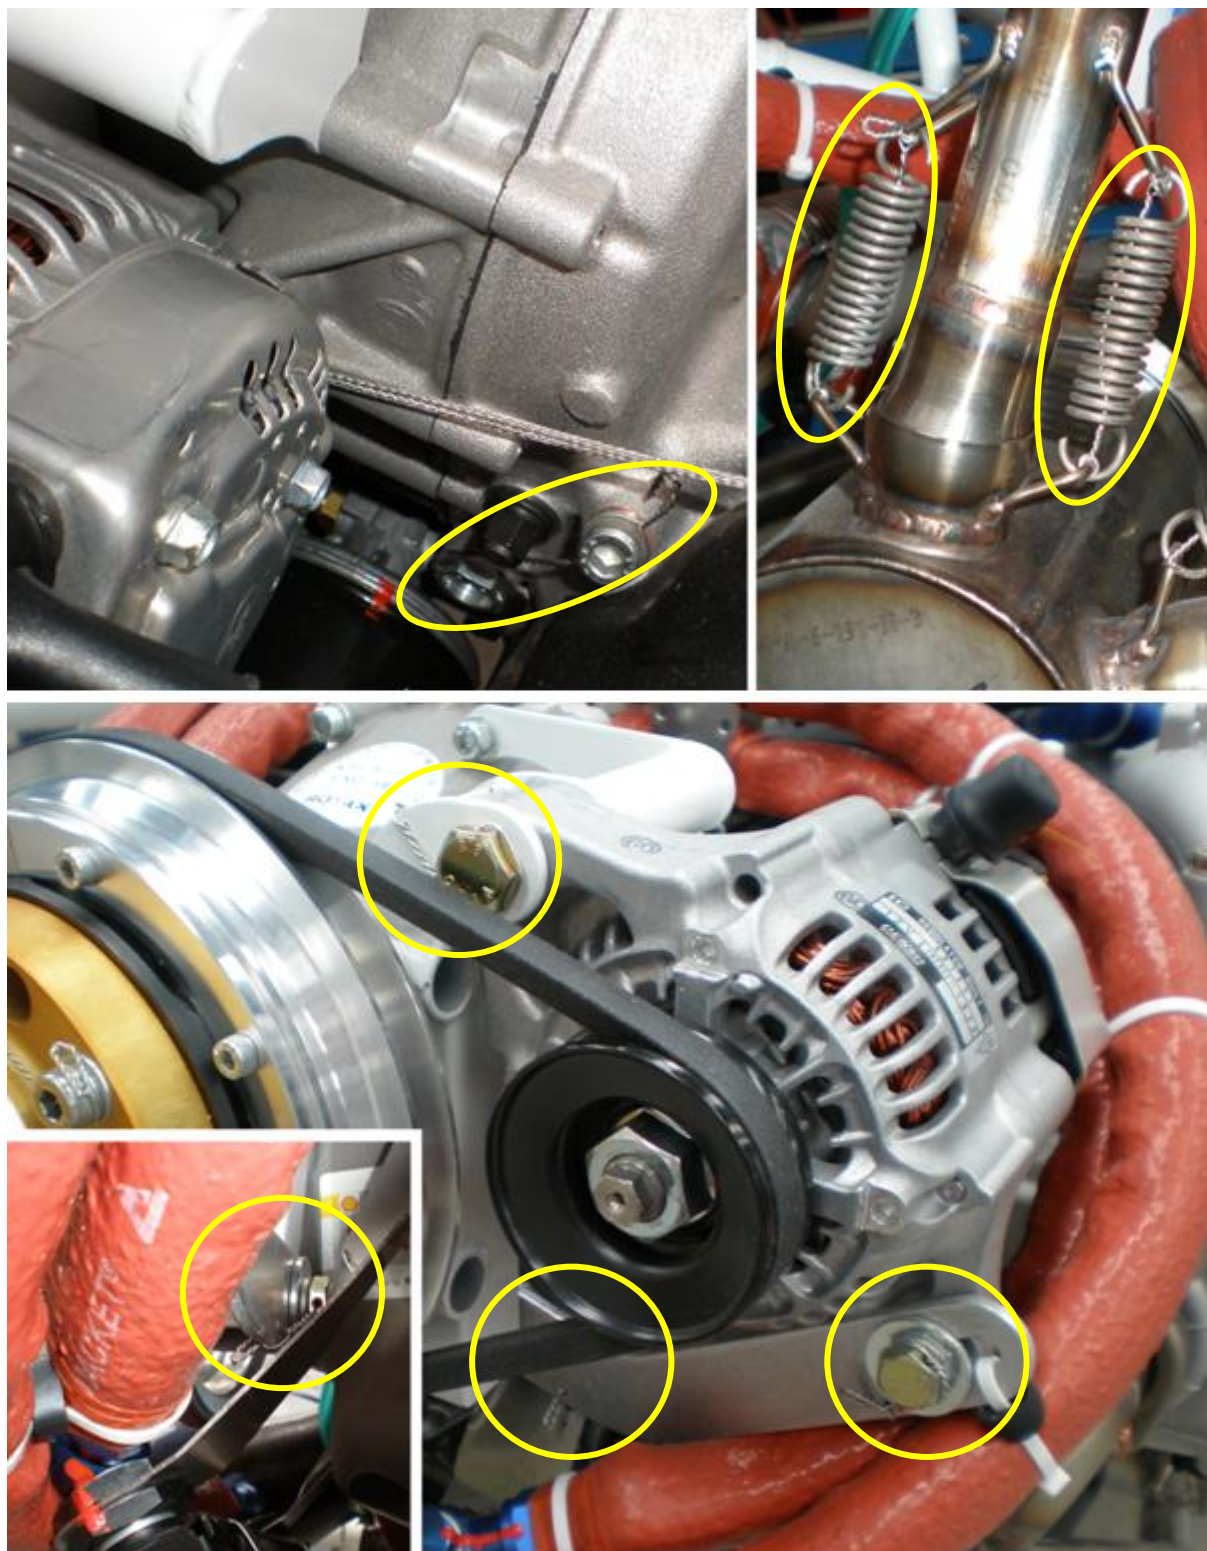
Stainless safety wire 0,8mm application – magnetic plug, exhaust joint springs, external alternator attachment
